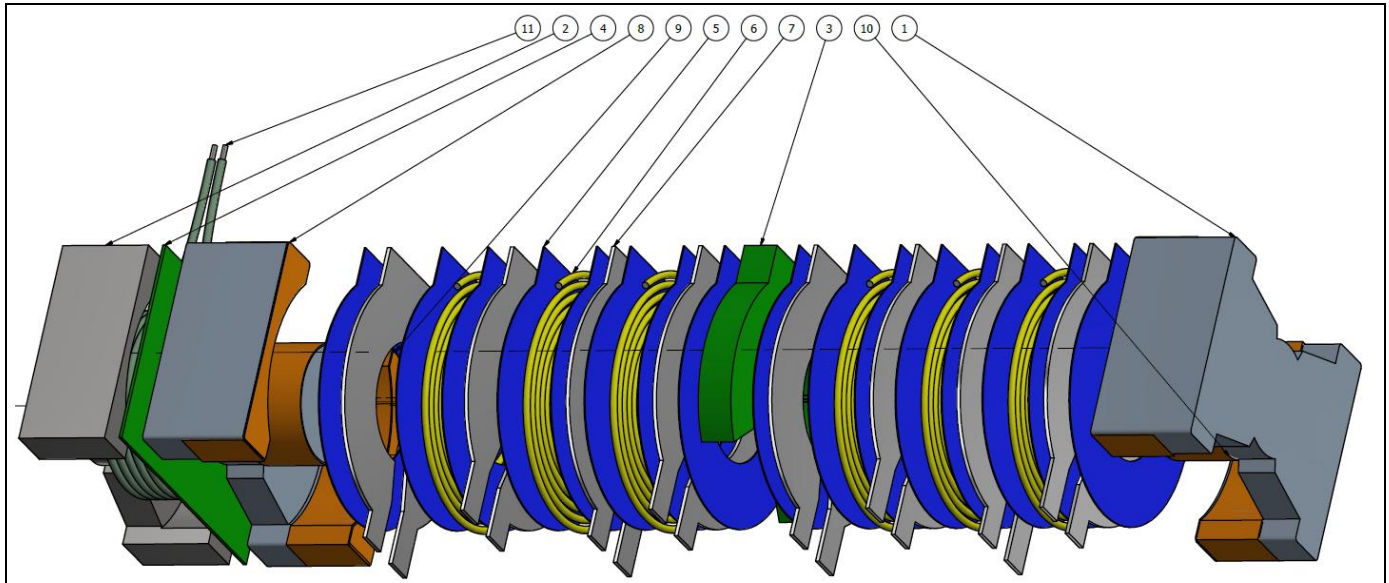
Main transformer and external resonant inductance. Mechanical drawing.
